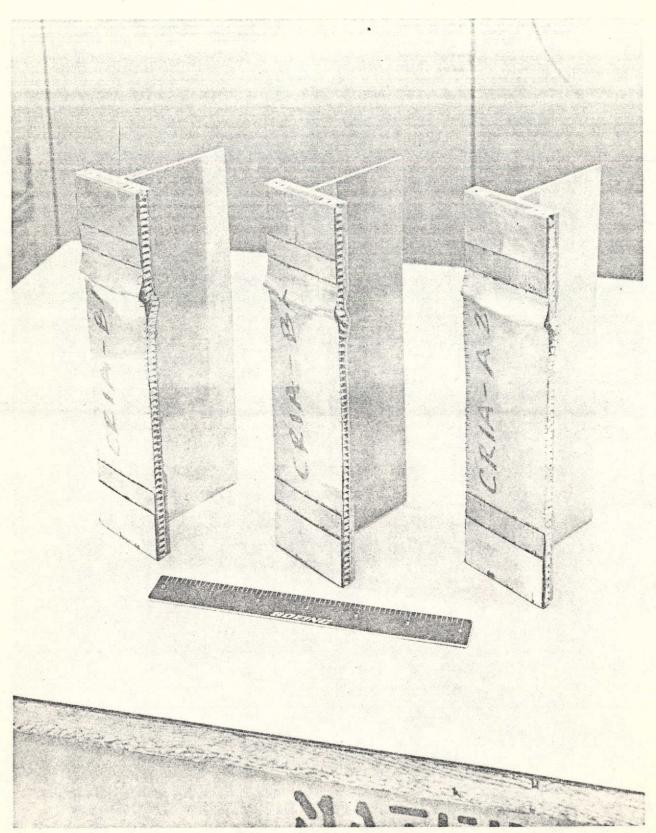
Failed Aluminum Chord Crippling Specimens — Boron/Epoxy
